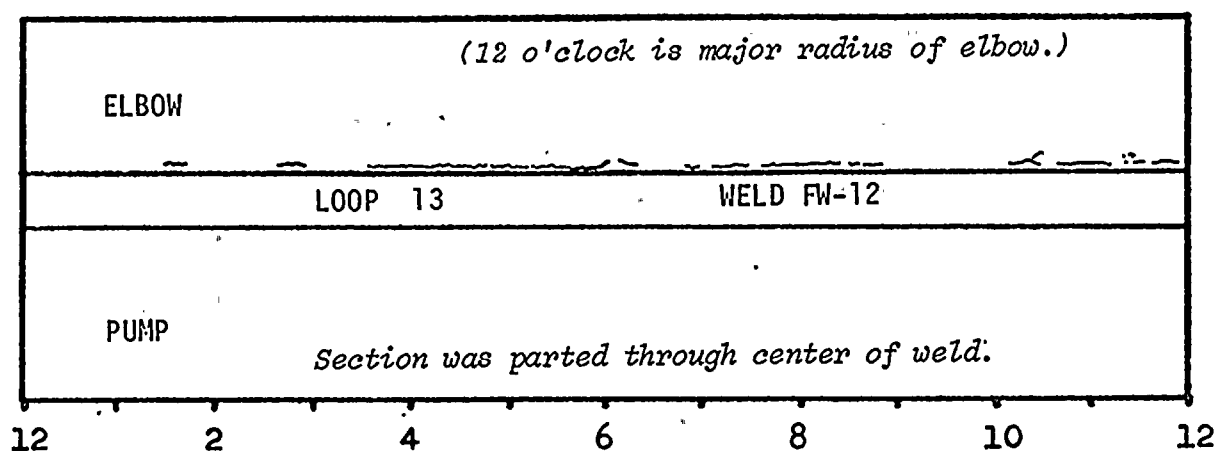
(Continued) Dye Penetrant inspection results, Loop 13 welds. (Refer to Figure 3 for weld locations.)
